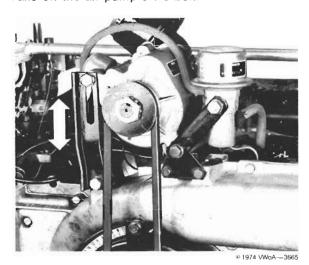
Pump belt adjustment (double arrow). To remove the belt, pull the pump pulley down.
